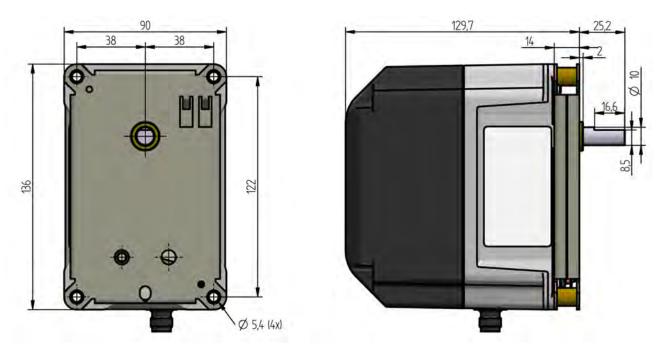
Dimensional drawing of actuator type 662R5009-0 without cable but with plug
